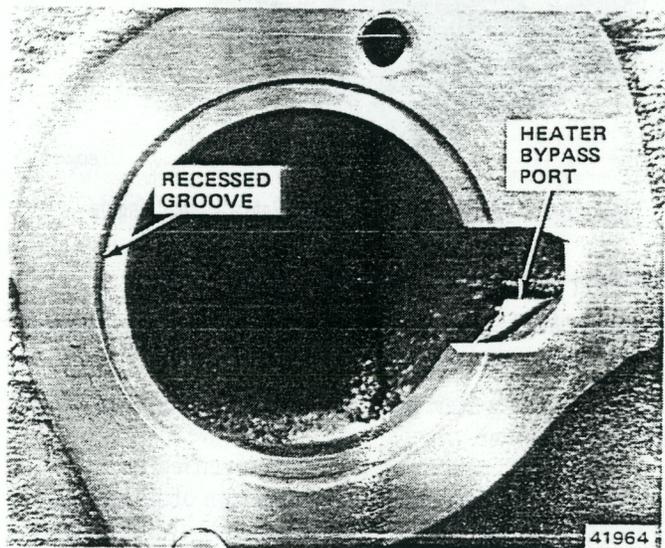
C-6 Thermostat Recess—Six-Cylinder Engine
